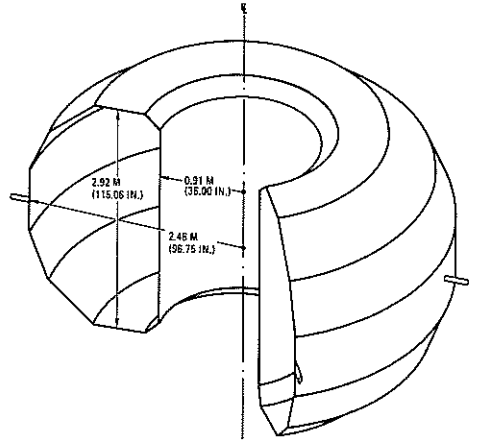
Cutout view and outer dimensions of the Big Dee vacuum vessel (port openings not shown).
